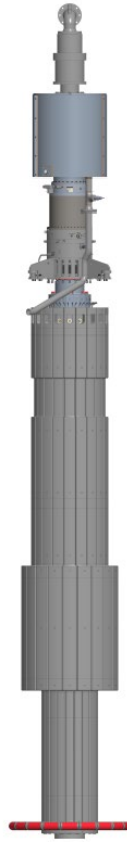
Configuration of Target Assembly, at end of testing, and before disassembly
